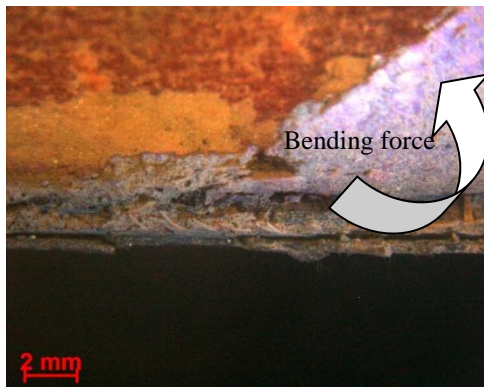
Damage at inner and outer skin of tail rotor blade
